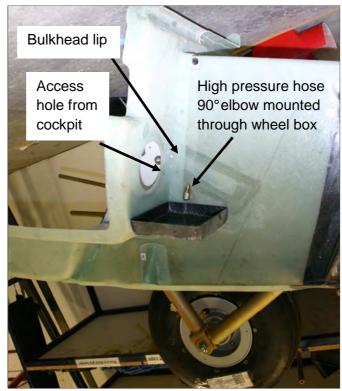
Access to High pressure hose 90°elbow go ing into wheel box
